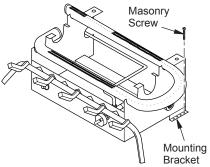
Attaching Base Assembly to Fireplace Floor - Dual Burner Model
